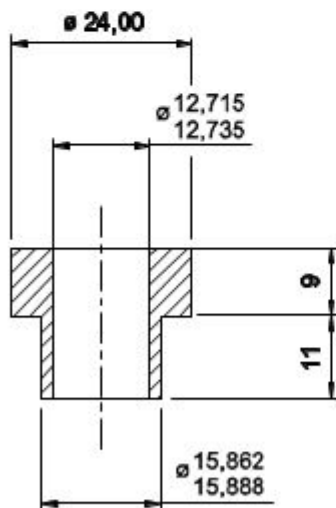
Tool set (Support equipment Ref. 1) – preparing (sheet 1 of 2)
